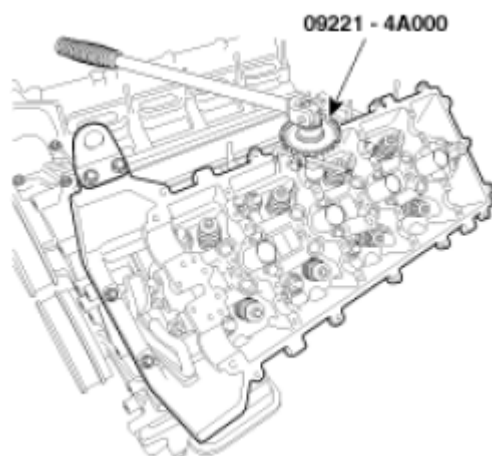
Tightening Cylinder Head Bolts Using SST(09221-4A000)
